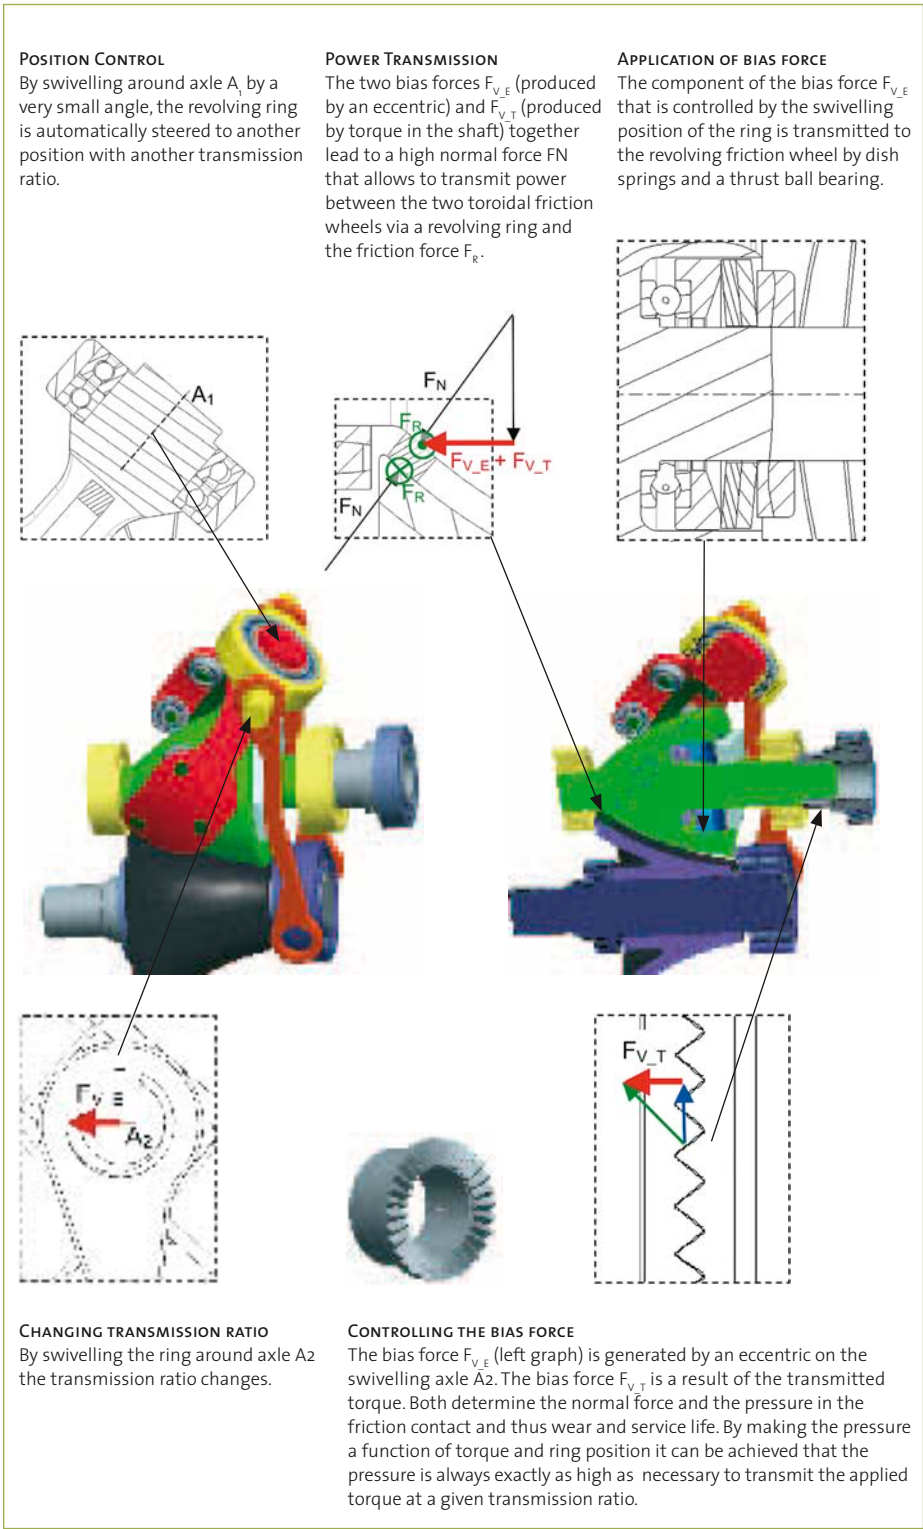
CONCEPT OF A TOROID RING GEARING TRG OPTIMIZED FOR WEAR AND SERVICE LIFE
